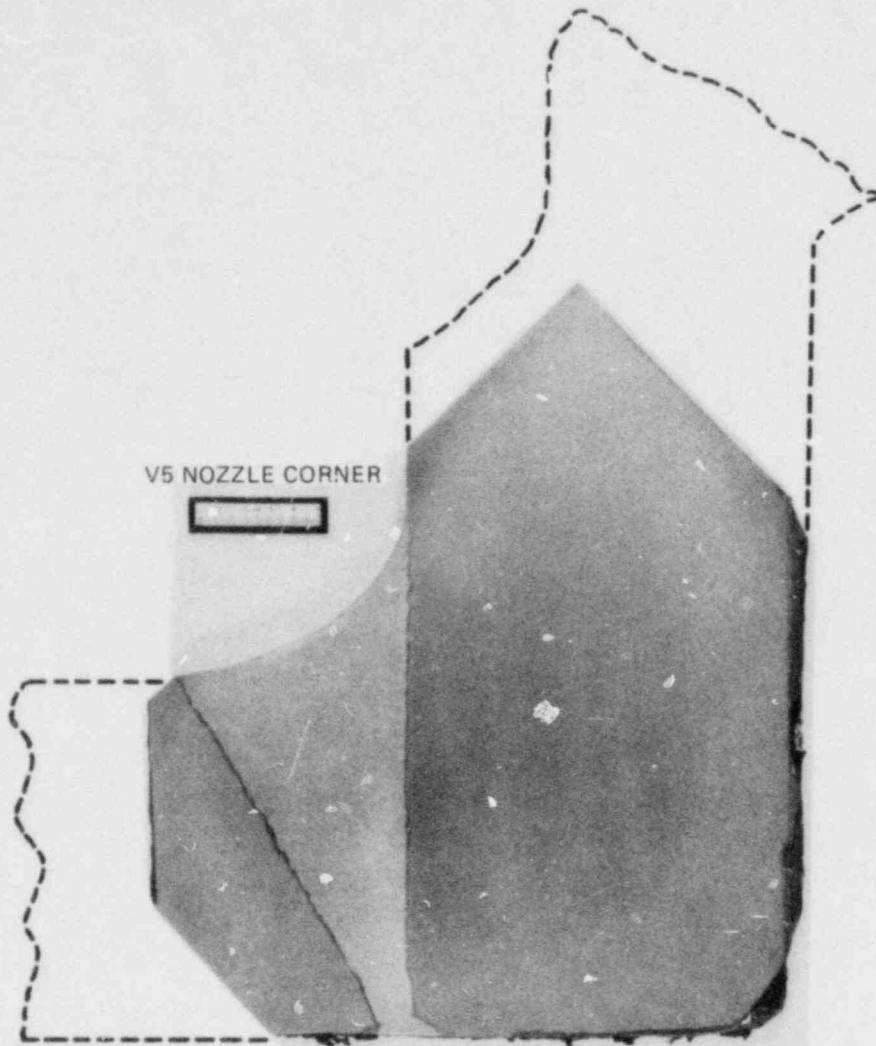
Vessel V-5, cross section of nozzle-to-cylinder vessel fabrication weld.
